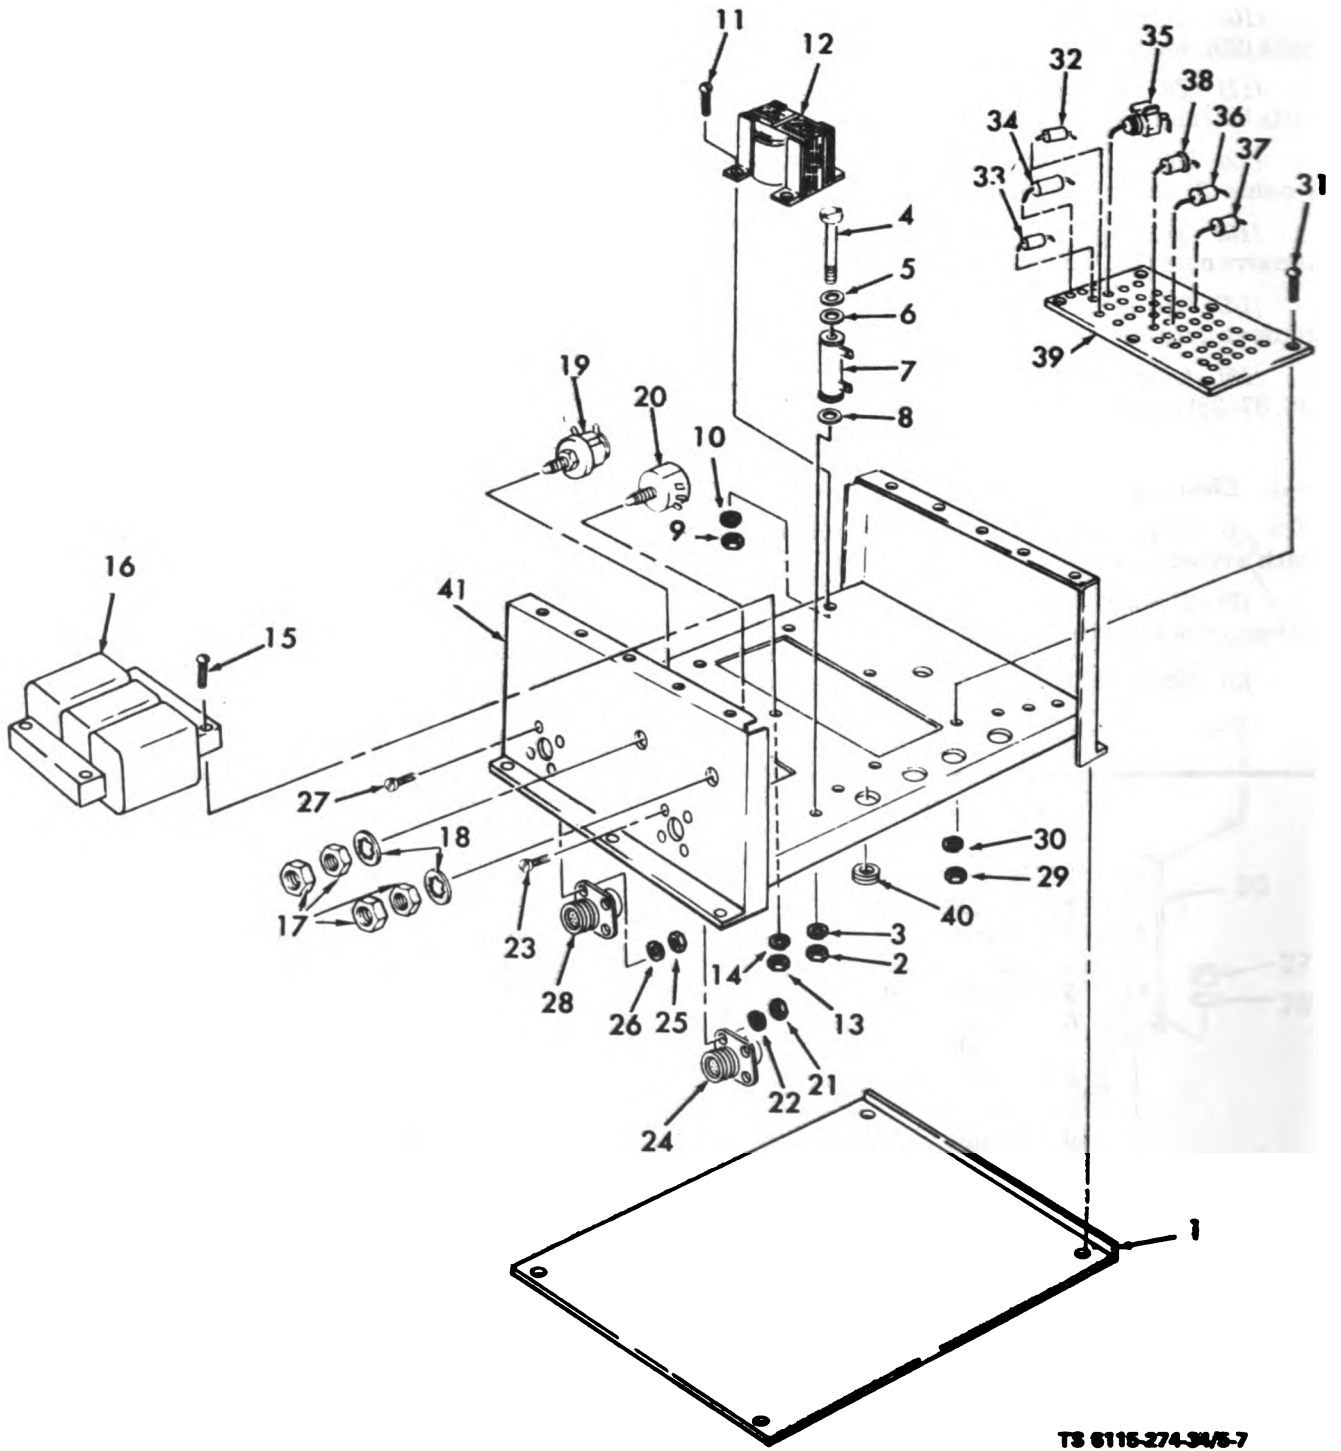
Electric Governor Control Unit Transformer, Choke, Diode Board, Resistors and Receptacles, Disassembly and Assembly (Con't.)
